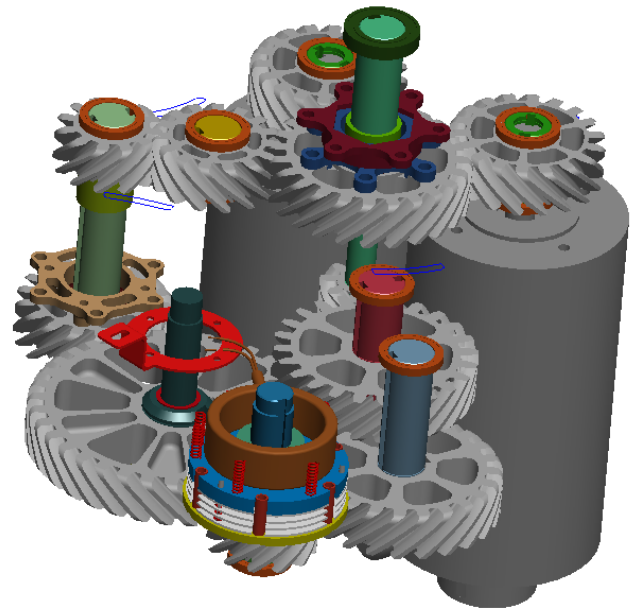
NASA Johnson Space Center Chariot gearbox design.
